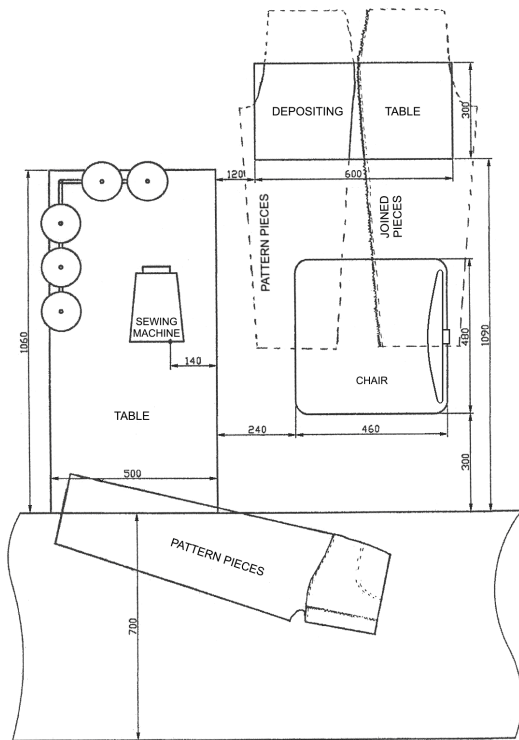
Lay-out of the workplace and positions of the patterned pieces
